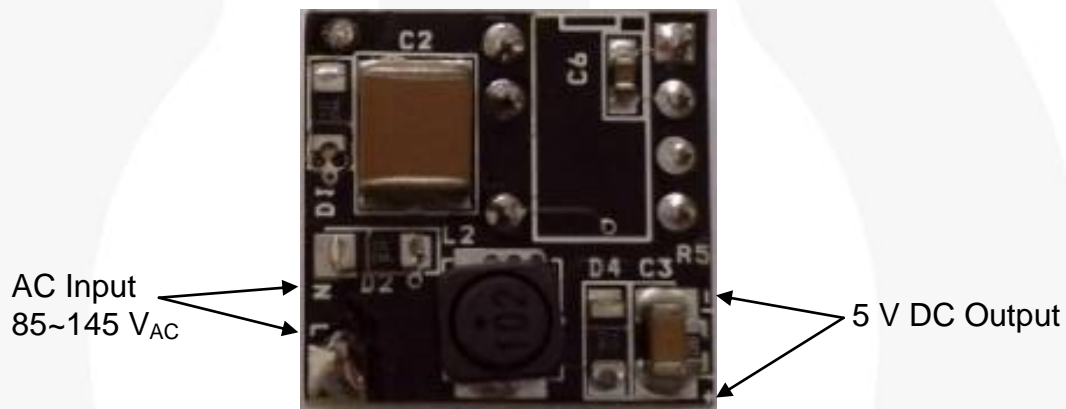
Bottom View (Dimension 18 x 18 [mm²])
